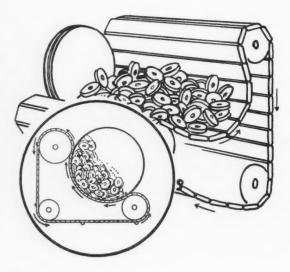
Diagrammatic view of barrel-type machine, showing the endless apron conveyor principle used for handling the work.
